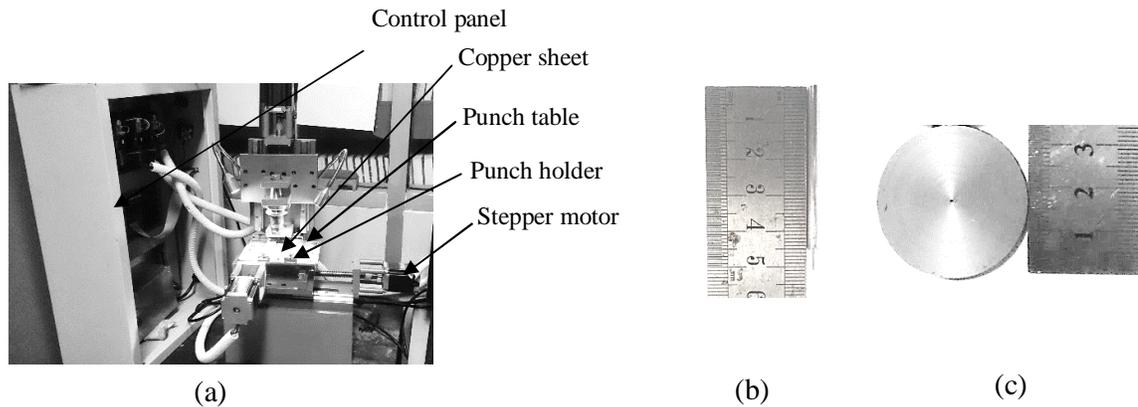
(a)Micro Punch CNC Machine, (b) punch tool, (c) die
